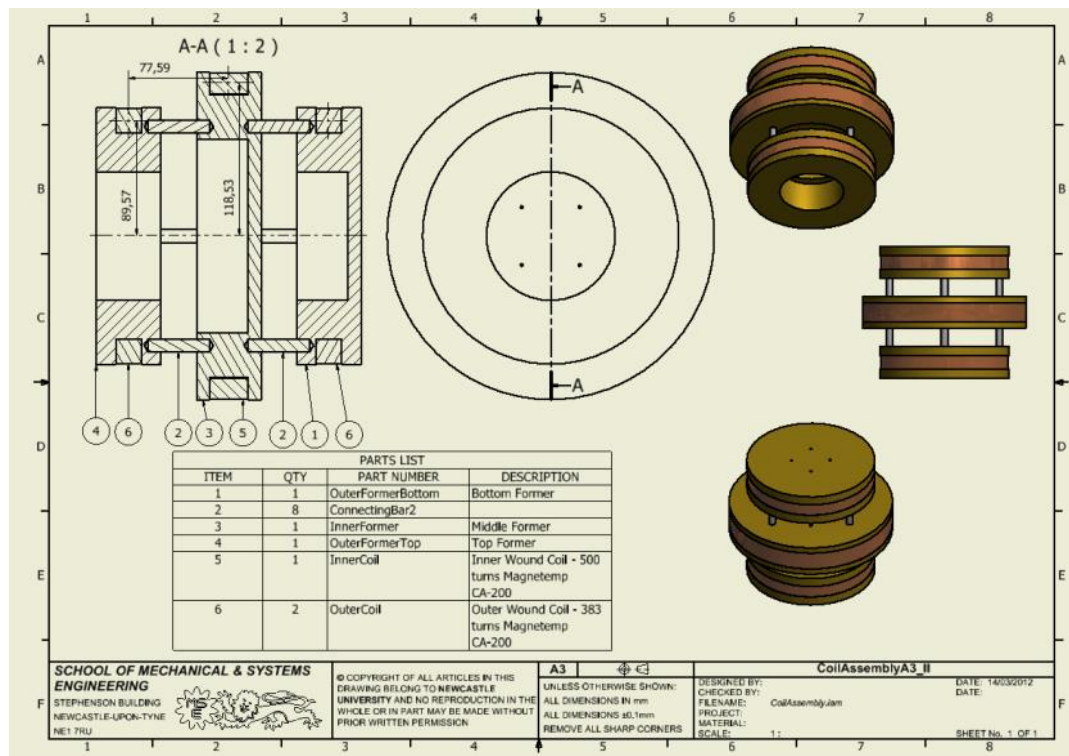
Engineering assembly drawing for the Maxwell Coil, as fabricated. The coil centre coordinates are illustrated.
